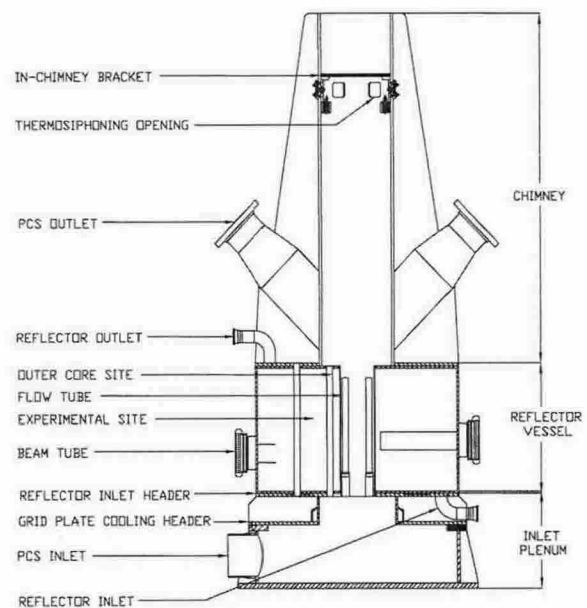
Vertical cross sectional view of the HANARO reactor structure assembly.
